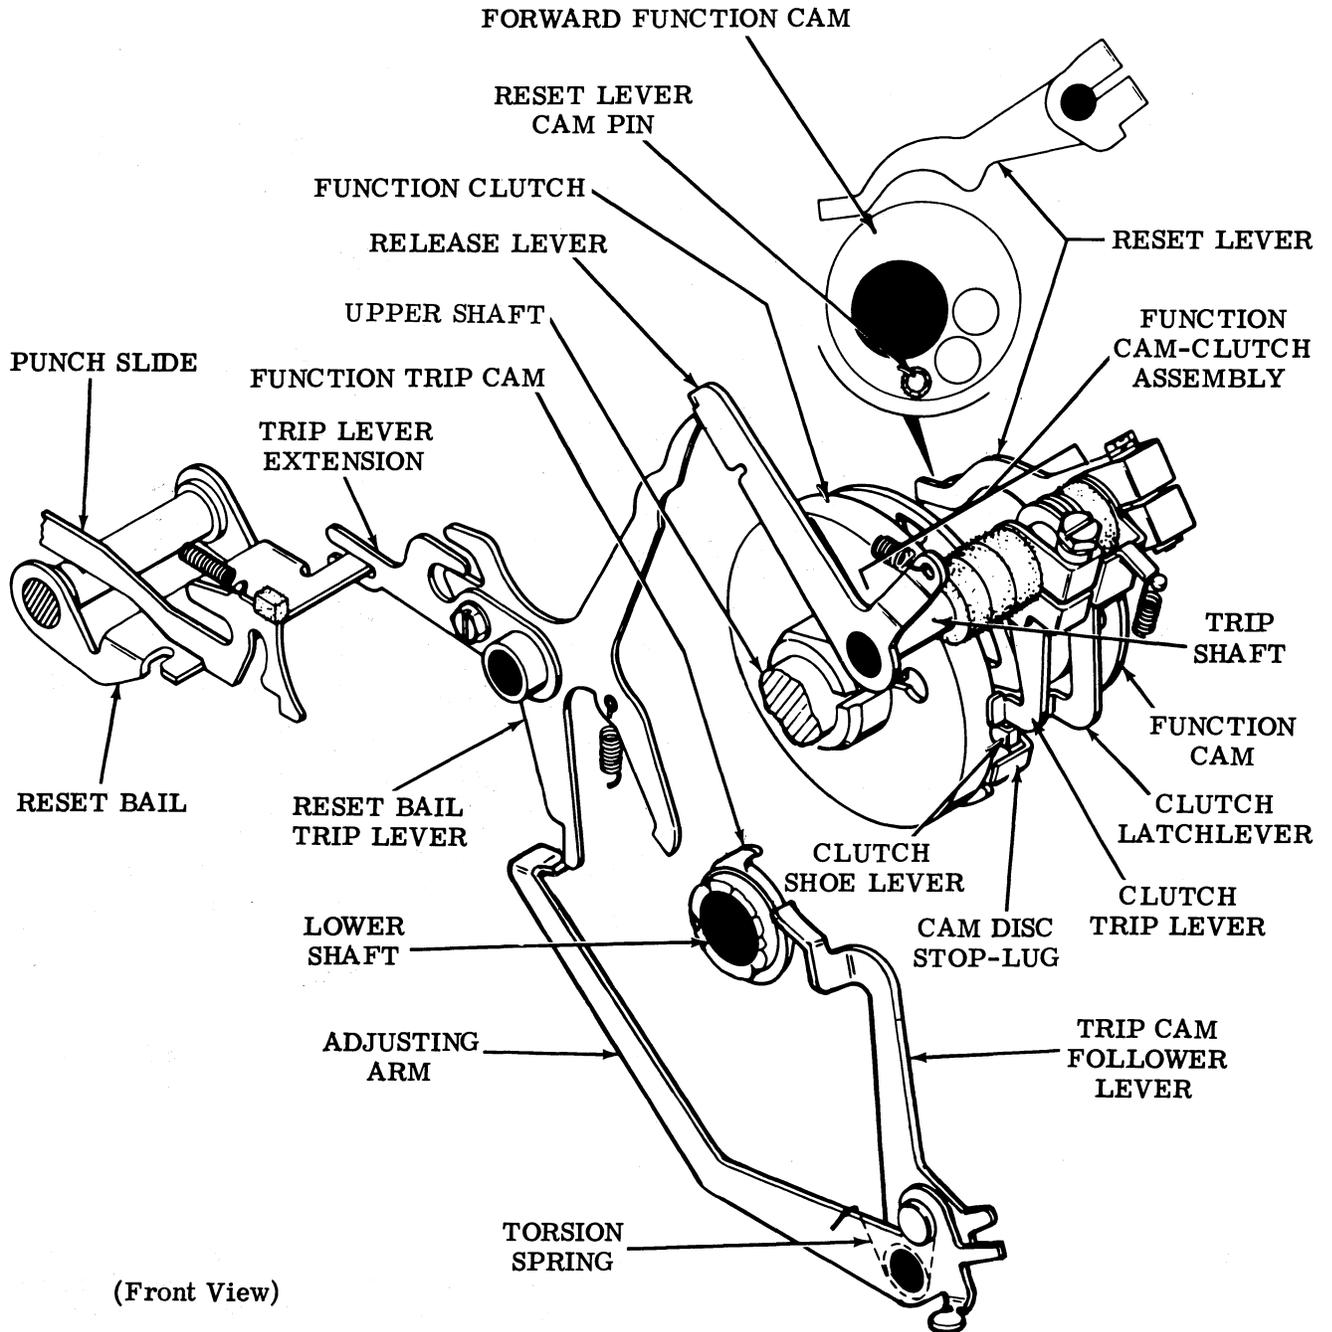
Function Cam-Clutch and Clutch Trip Assembly
